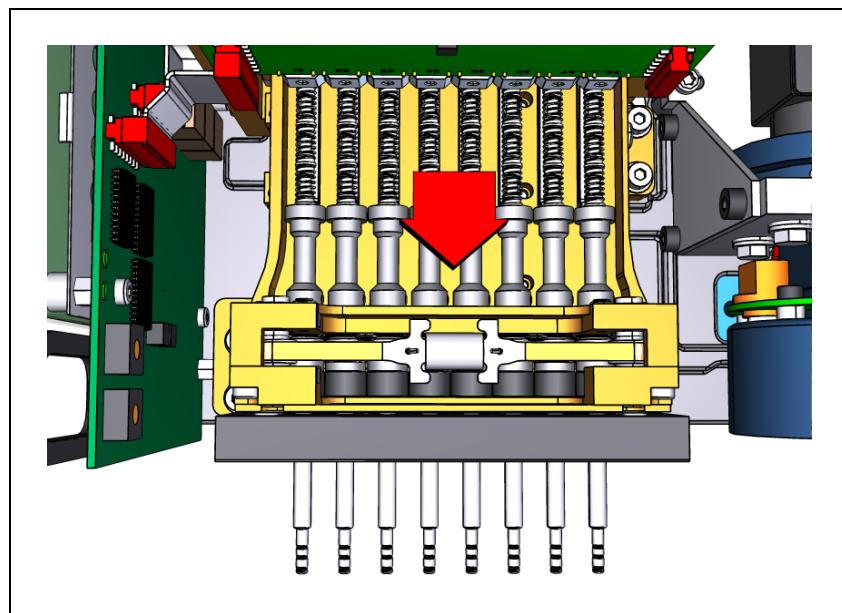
Tooltubes and Hz-wagon in lower position.
